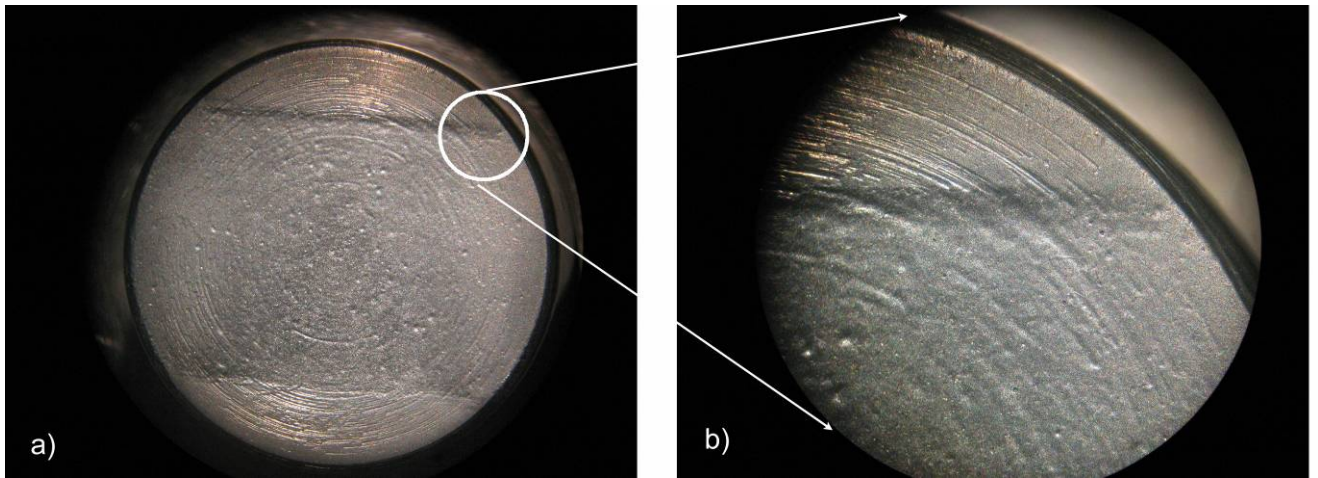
a) Top view of P20 steel sample after micro-machining, b) detail of the ridge region
